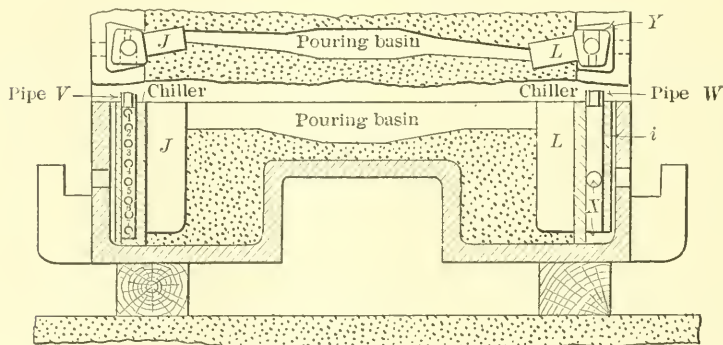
CHILLER MOLD FOR TESTING CHILLING EFFECT ON CASTINGS BY COOLING CHILLER
